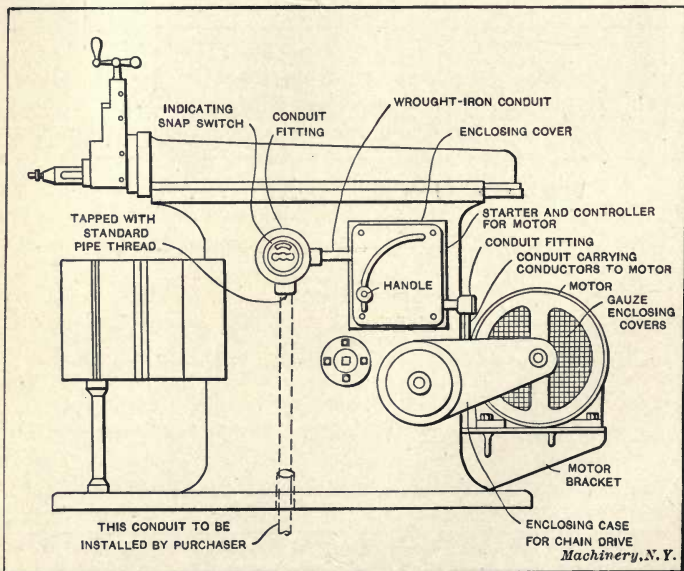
A Motor-driven Shaper with Completely Enclosed Wiring
